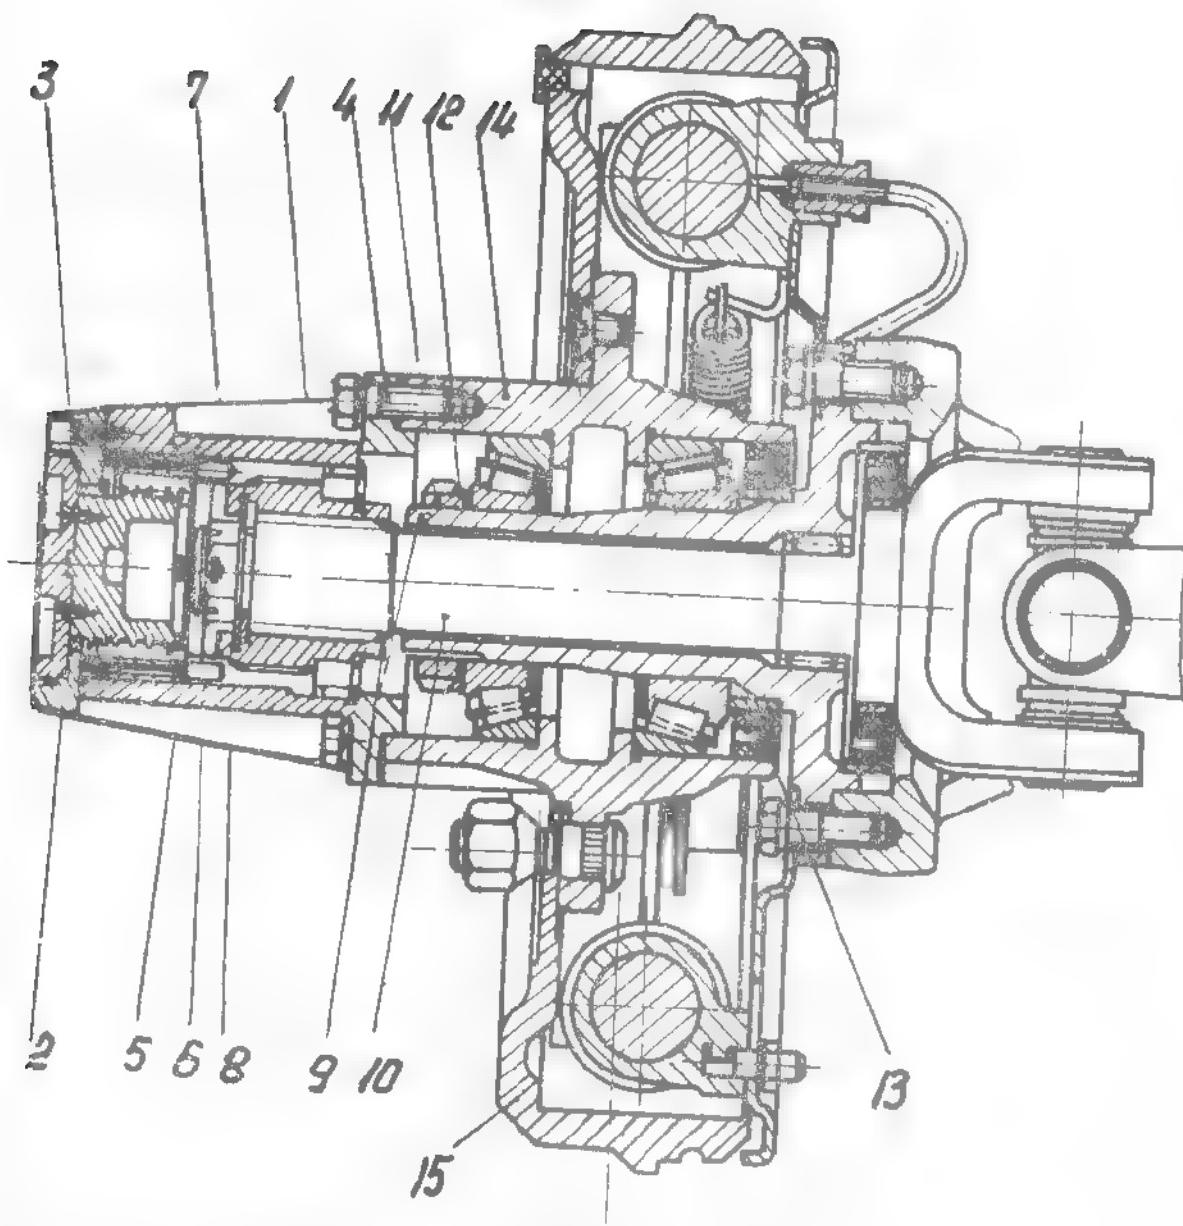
FRONT WHEEL BRAKE DRUM GING PIN ASSY
